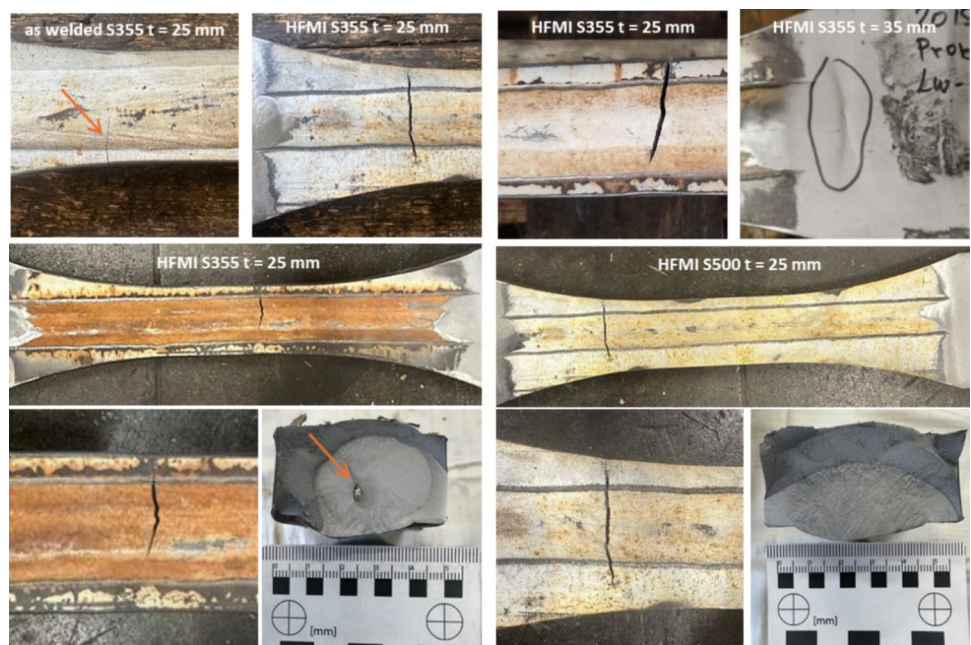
Failure locations of LB specimens in AW and HFMI-treated conditions (S355J2 + N 5, S500ML; $t=25/35$ mm) showing cracks at weld cap, base material, and clamping area
